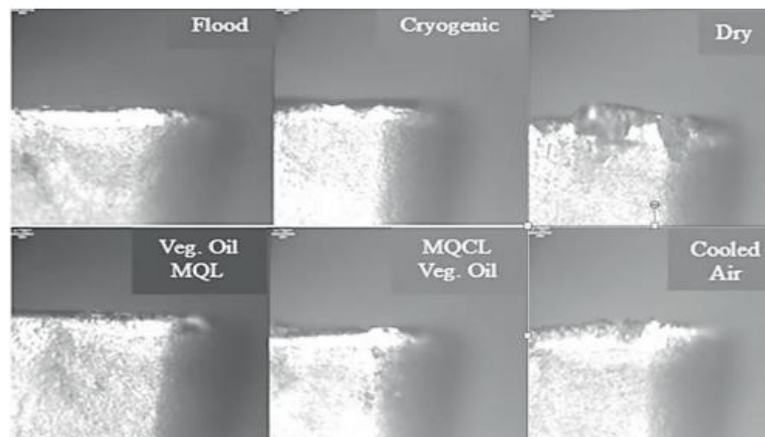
Flank tool wear at feed=0.1 mm/rev and speed = 90 m/min
